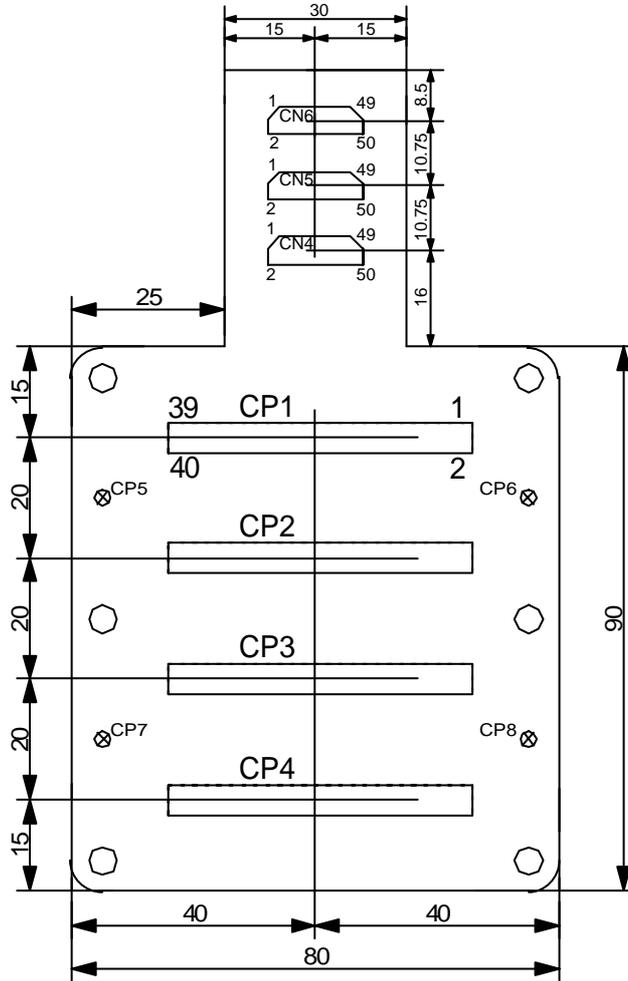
Mount Adapter for 100-pin QFP GF-package
